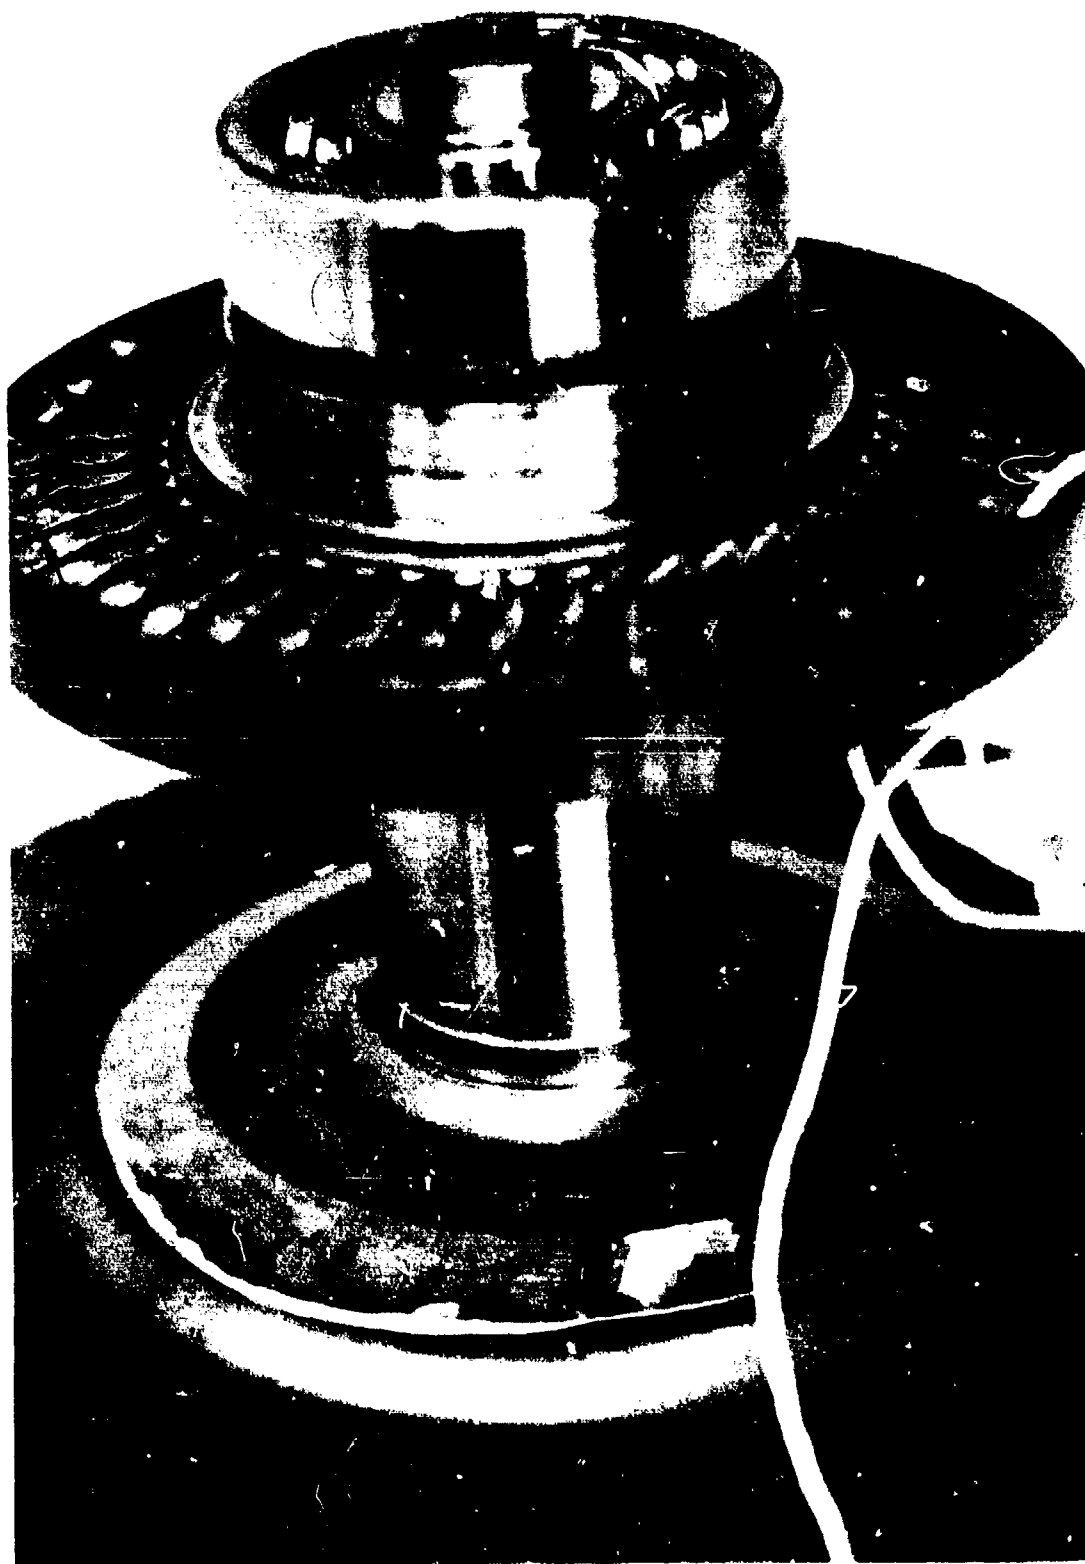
Hoist Drive S/N 2 Turbine Wheel.
